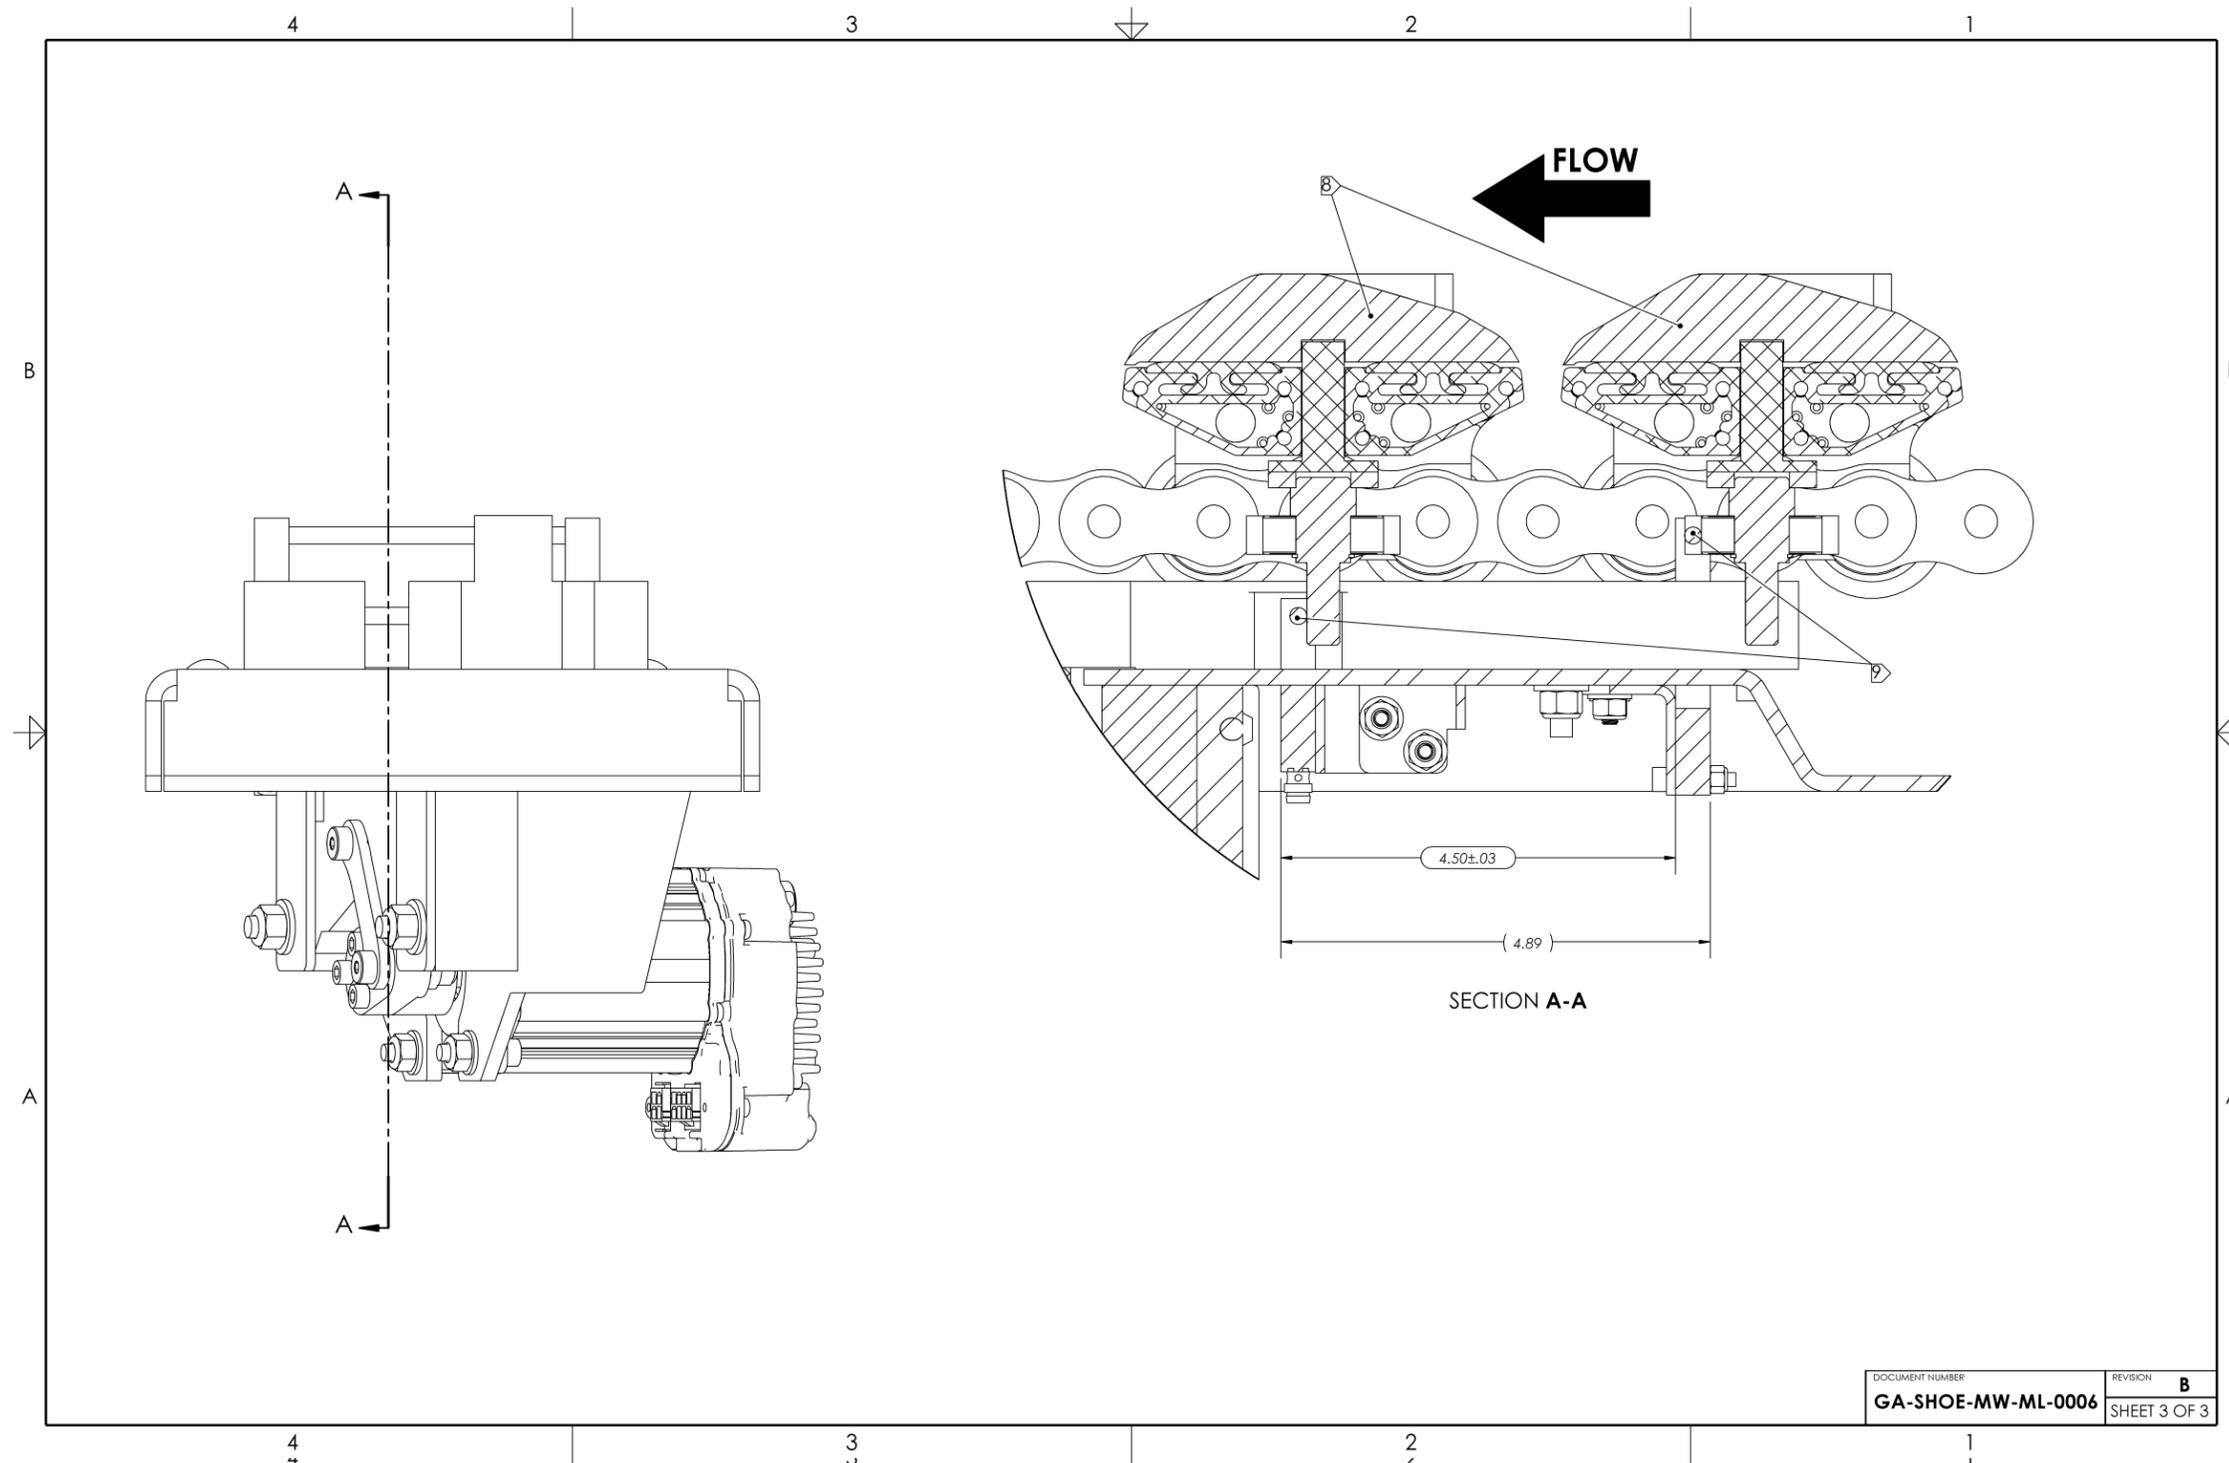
General Arrangement, Shoe Sorter Divert Switch, Sheet 3 of 3
